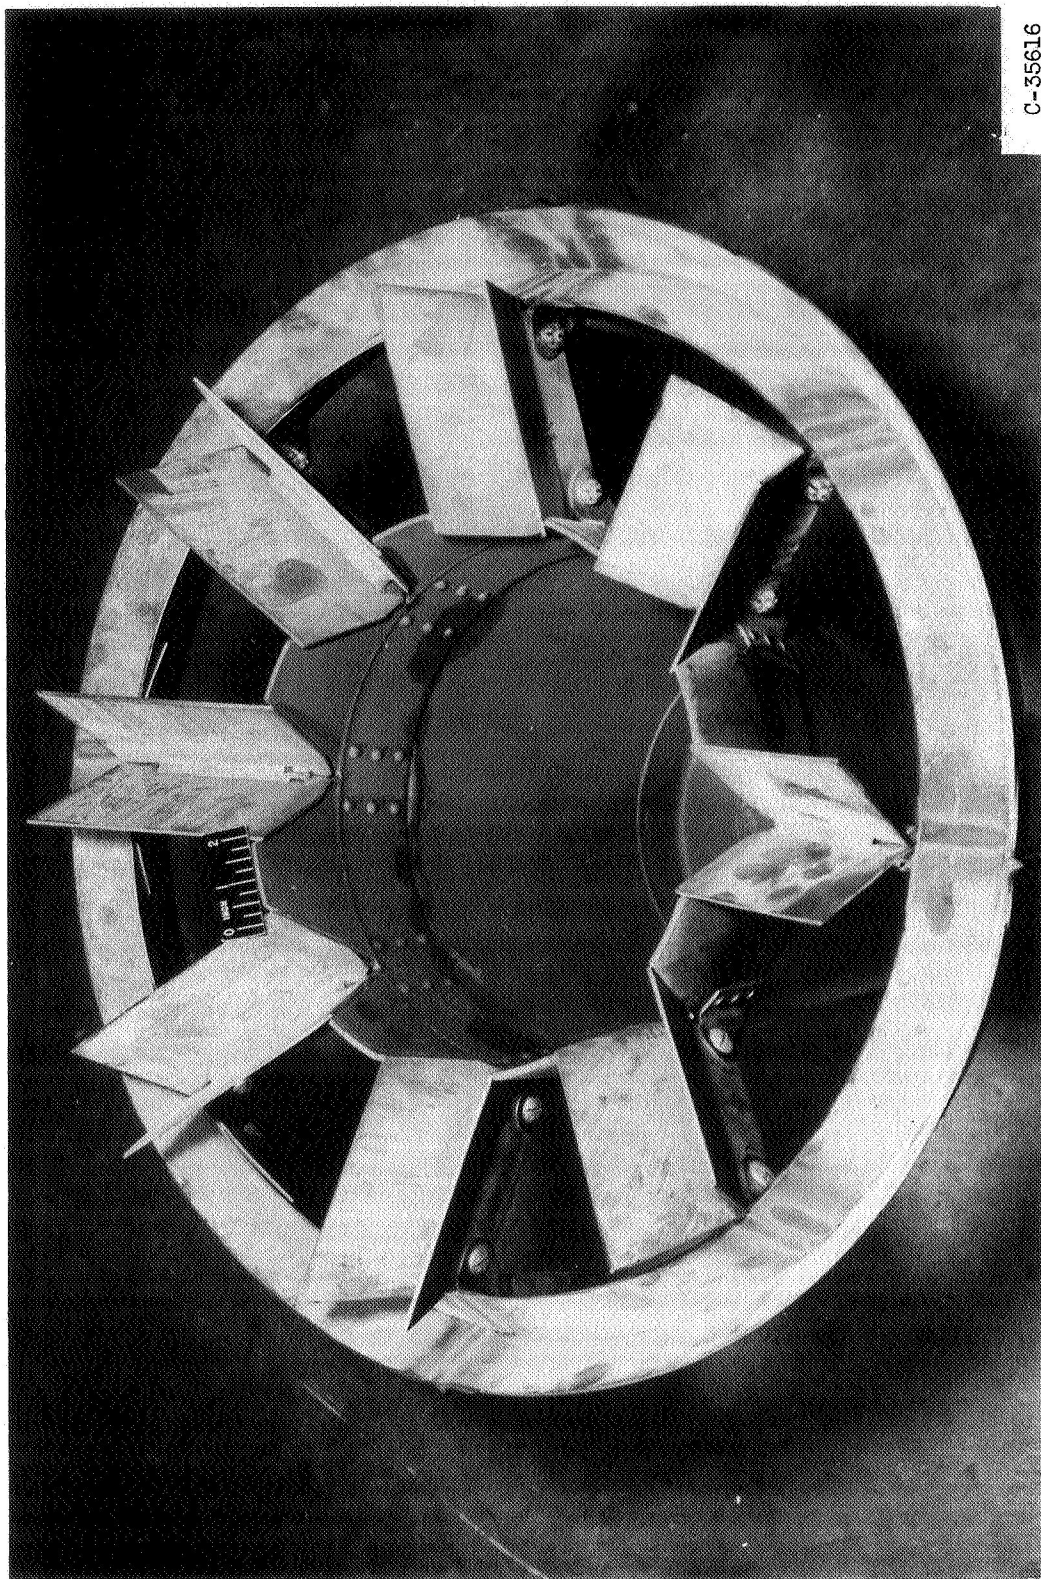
View looking upstream showing fuel-spray rings and grid installed in diffuser. Flame holder removed.
